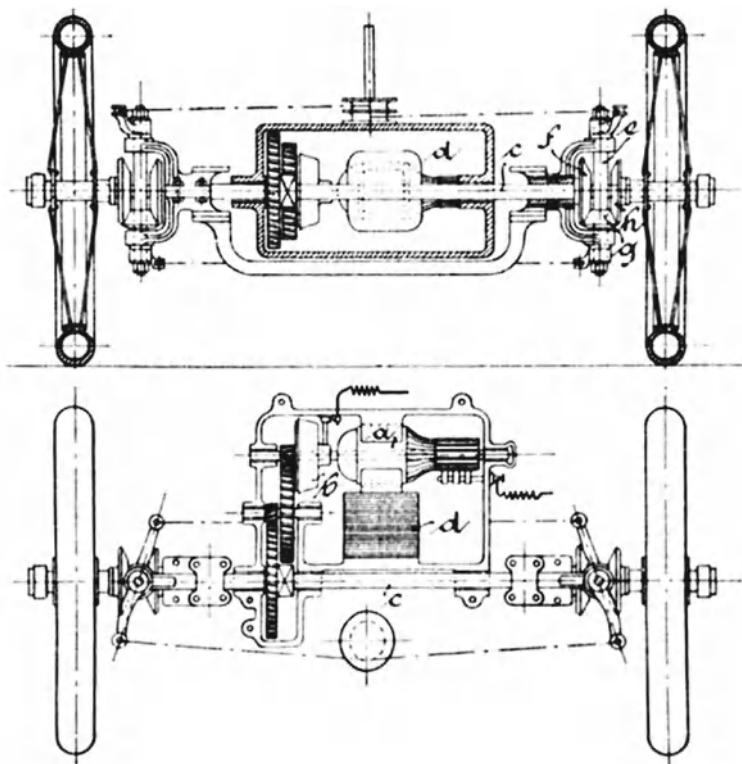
Front and top view of the driving and steering front axle of a Jeantaud Fiacre (From Dinglers Politechnischer Journal 1899)
